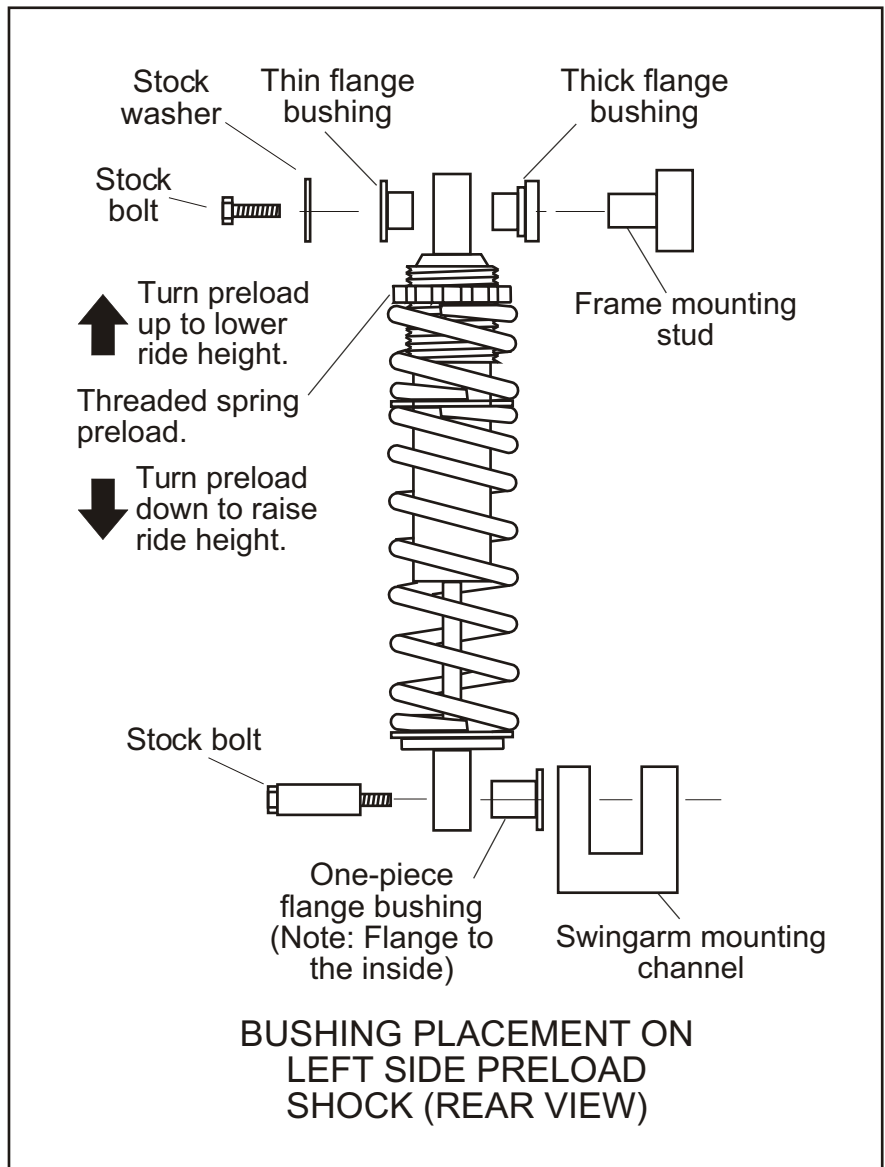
Bushing orientation for left side shock with threaded spring preload. No lubrication is required for these bushings.
